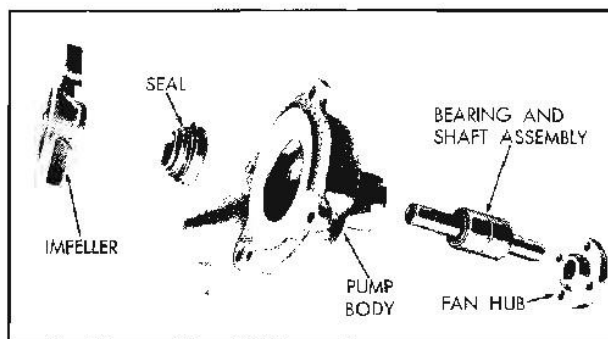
A-22 Water Pump - Exploded View (6 Cyl.)
